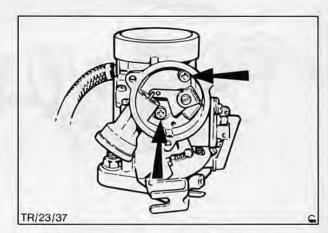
Choke housing securing screws (Carburettor viewed from the rear)
